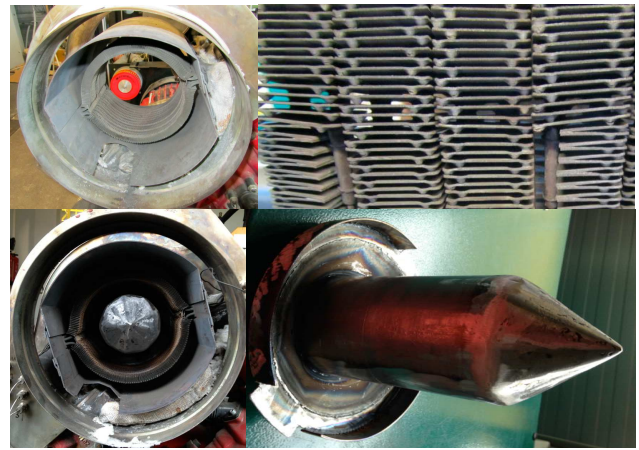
Finned tube heat exchanger section of the Stirling engine heater head (top) and modified section with mixing tube, baffle plate and end caps (bottom) [11].
